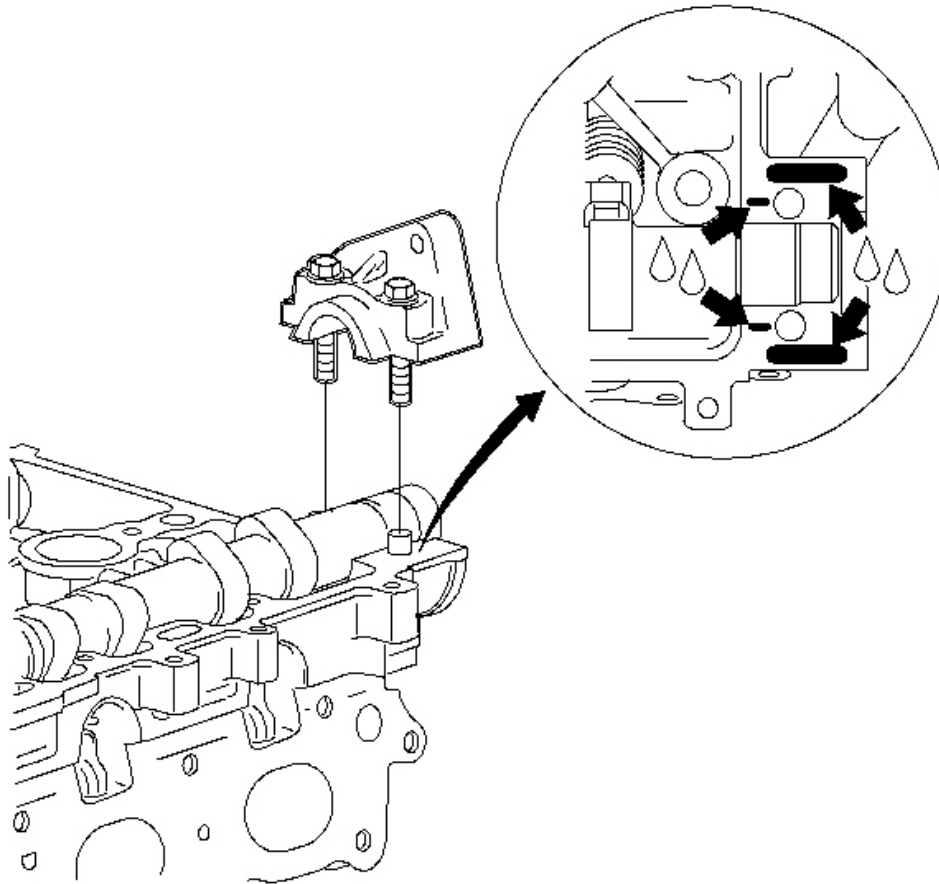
Installing Rear Intake Camshaft Bearing Cap
